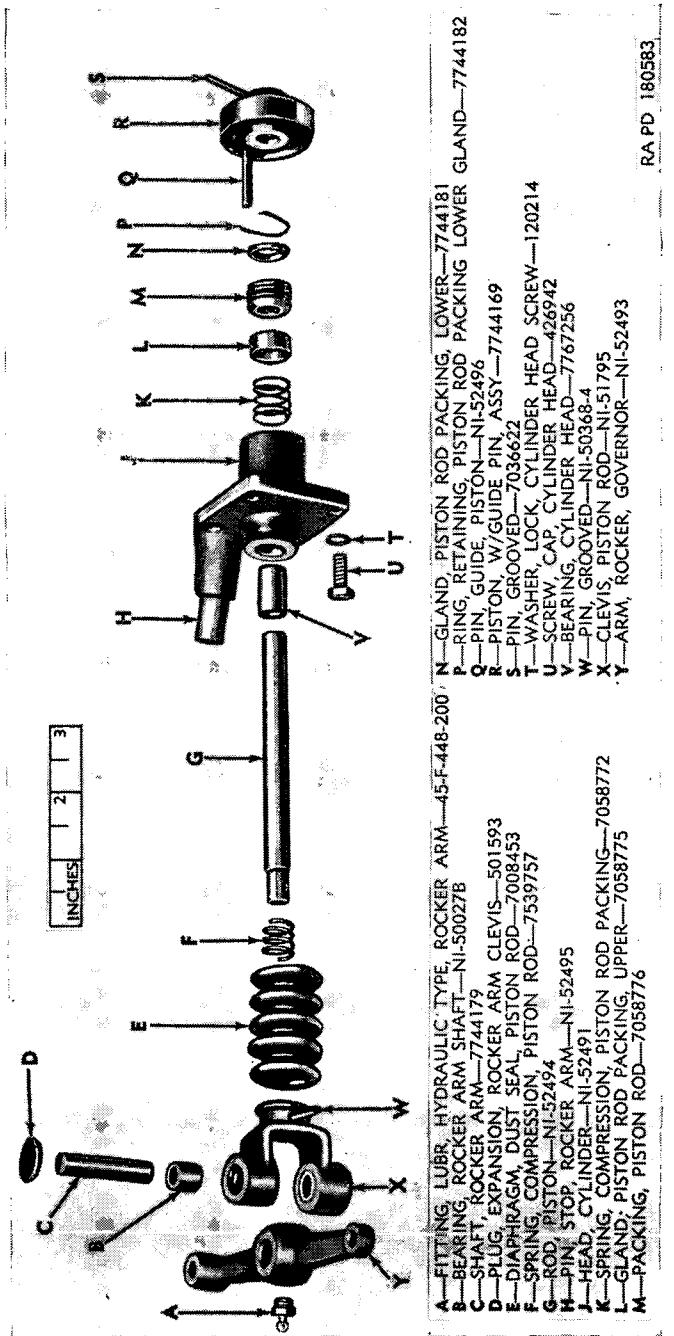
Hydraulic governor cylinder head assembly—exploded view.
